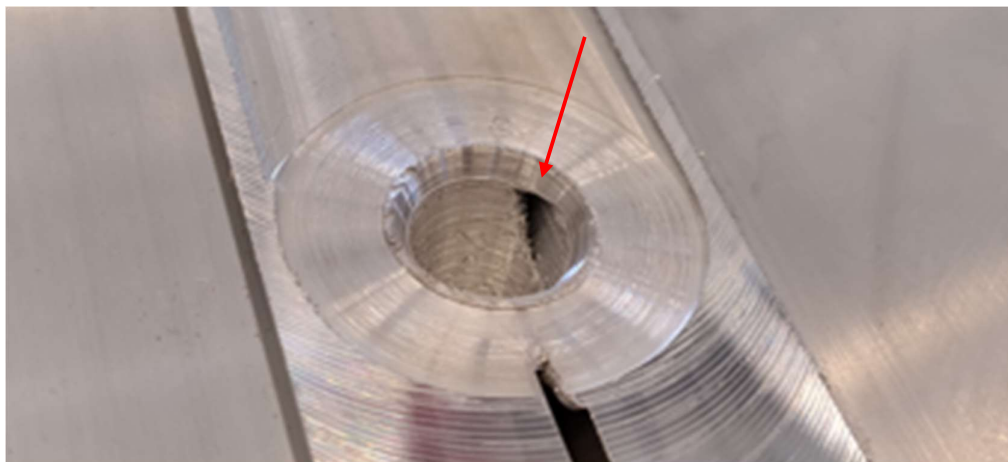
Void visible on the advancing side of exit hole on 3 Gap 17mm weld
